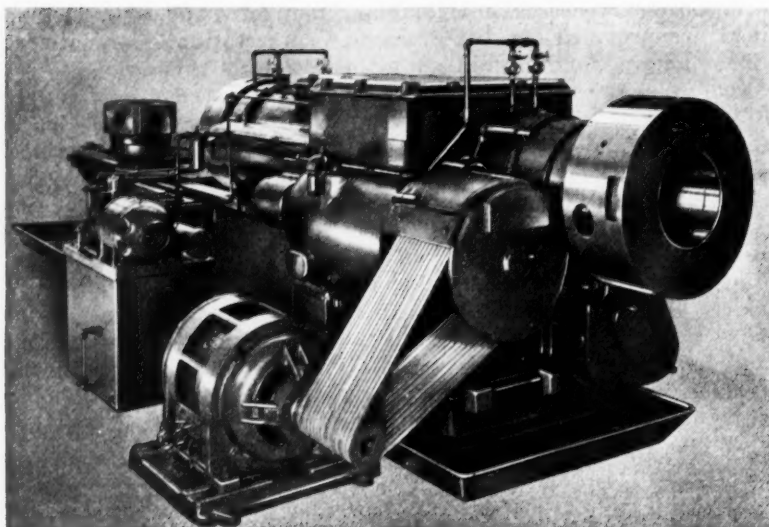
Rear View of Lathe Illustrated in Fig. 1, which Shows Spindle Drive and Motor-driven Hydraulic Equipment for Operating the Chucks at Each End of the Spindle
